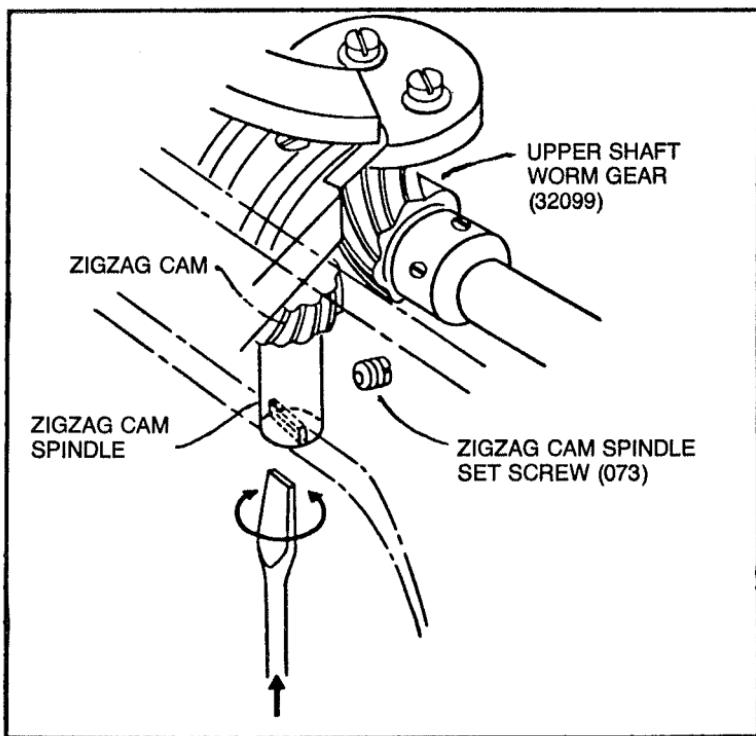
Incorrect meshing of the cam shaft gear to the main shaft gear will cause noisy running.
